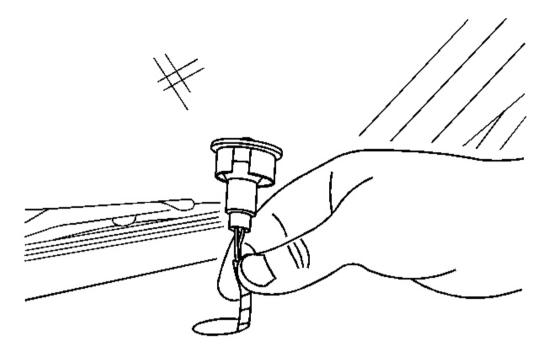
View Of Ambient Light Sensor Courtesy of GENERAL MOTORS CORP.
